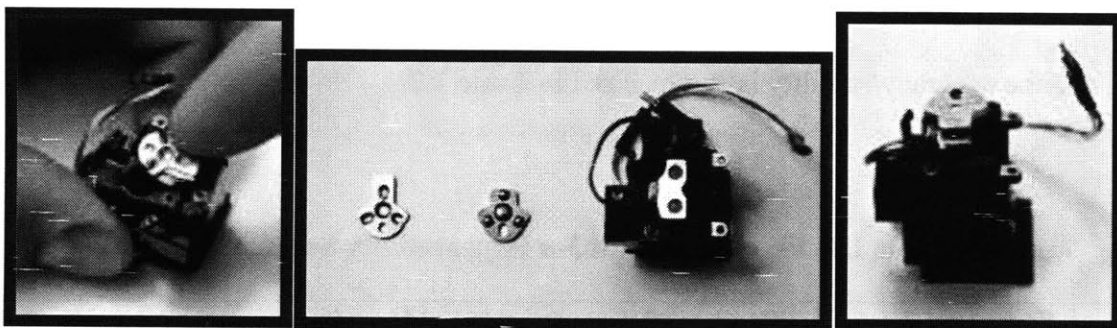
Accurate and repeatable kinematic fixture prototype mounted to a universal scanner mount of a DPN machine
